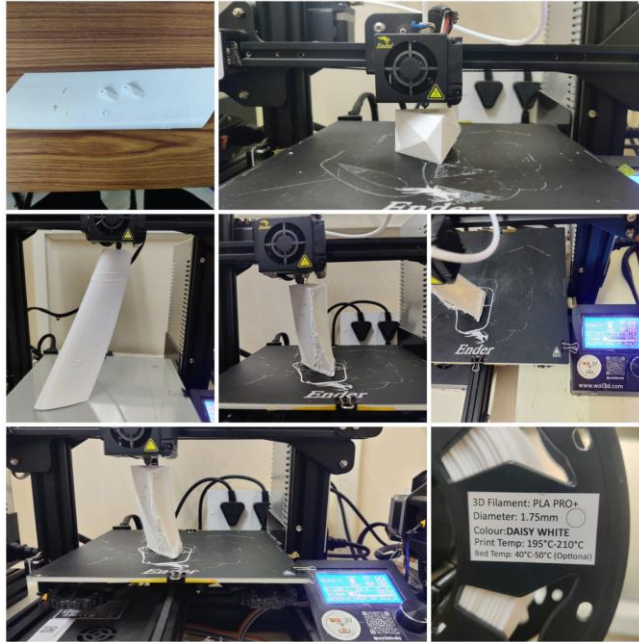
3D Printed Materials (Blades, arms, Hubs and gears) for VAWT.
